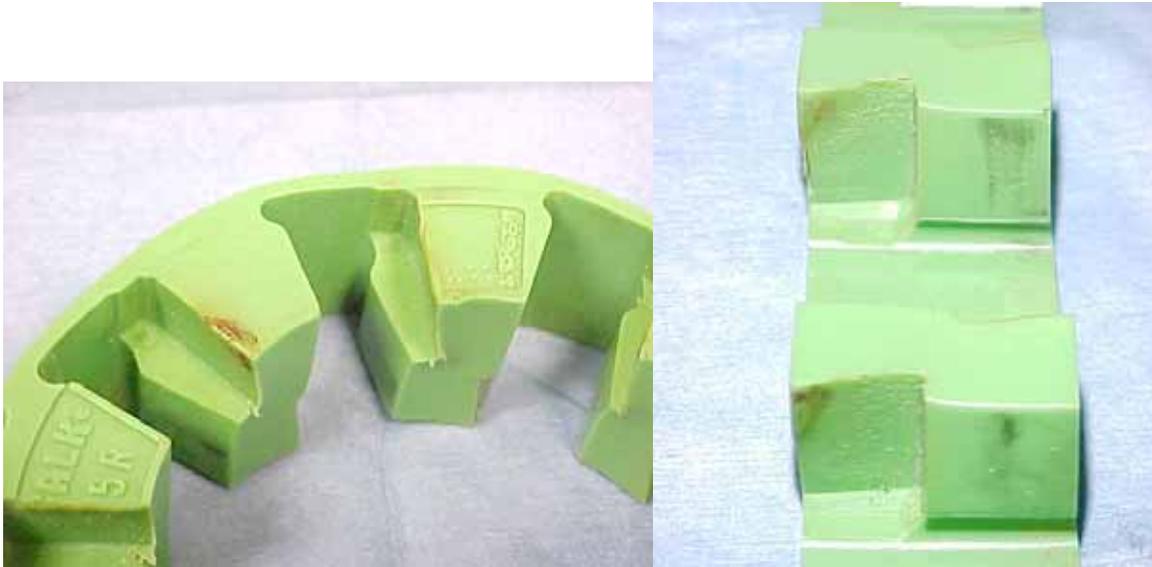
Partial Element Tooth Wear due to Excessive Angular Misalignment
